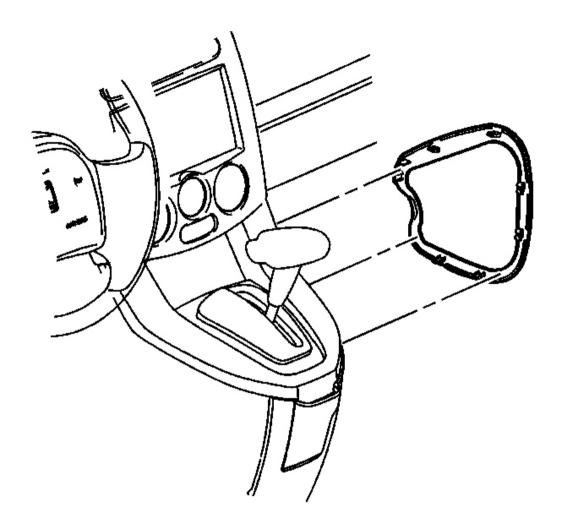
Control Assembly Boot Trim Courtesy of GENERAL MOTORS CORP.
